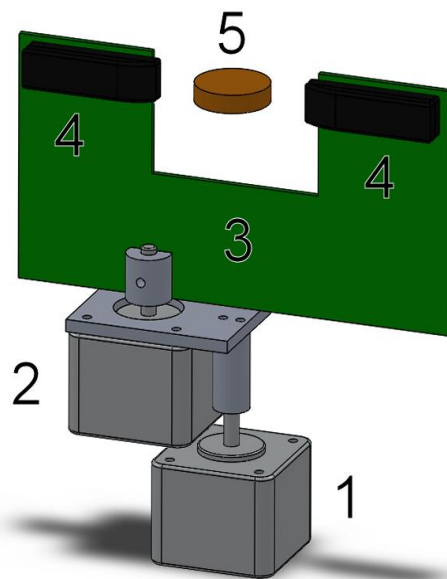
The EasyPET component layout: 1 - bottom motor, 2 - top motor, 3 - U-shaped PCB, 4 - pair of detector modules, 5 - radioactive source
